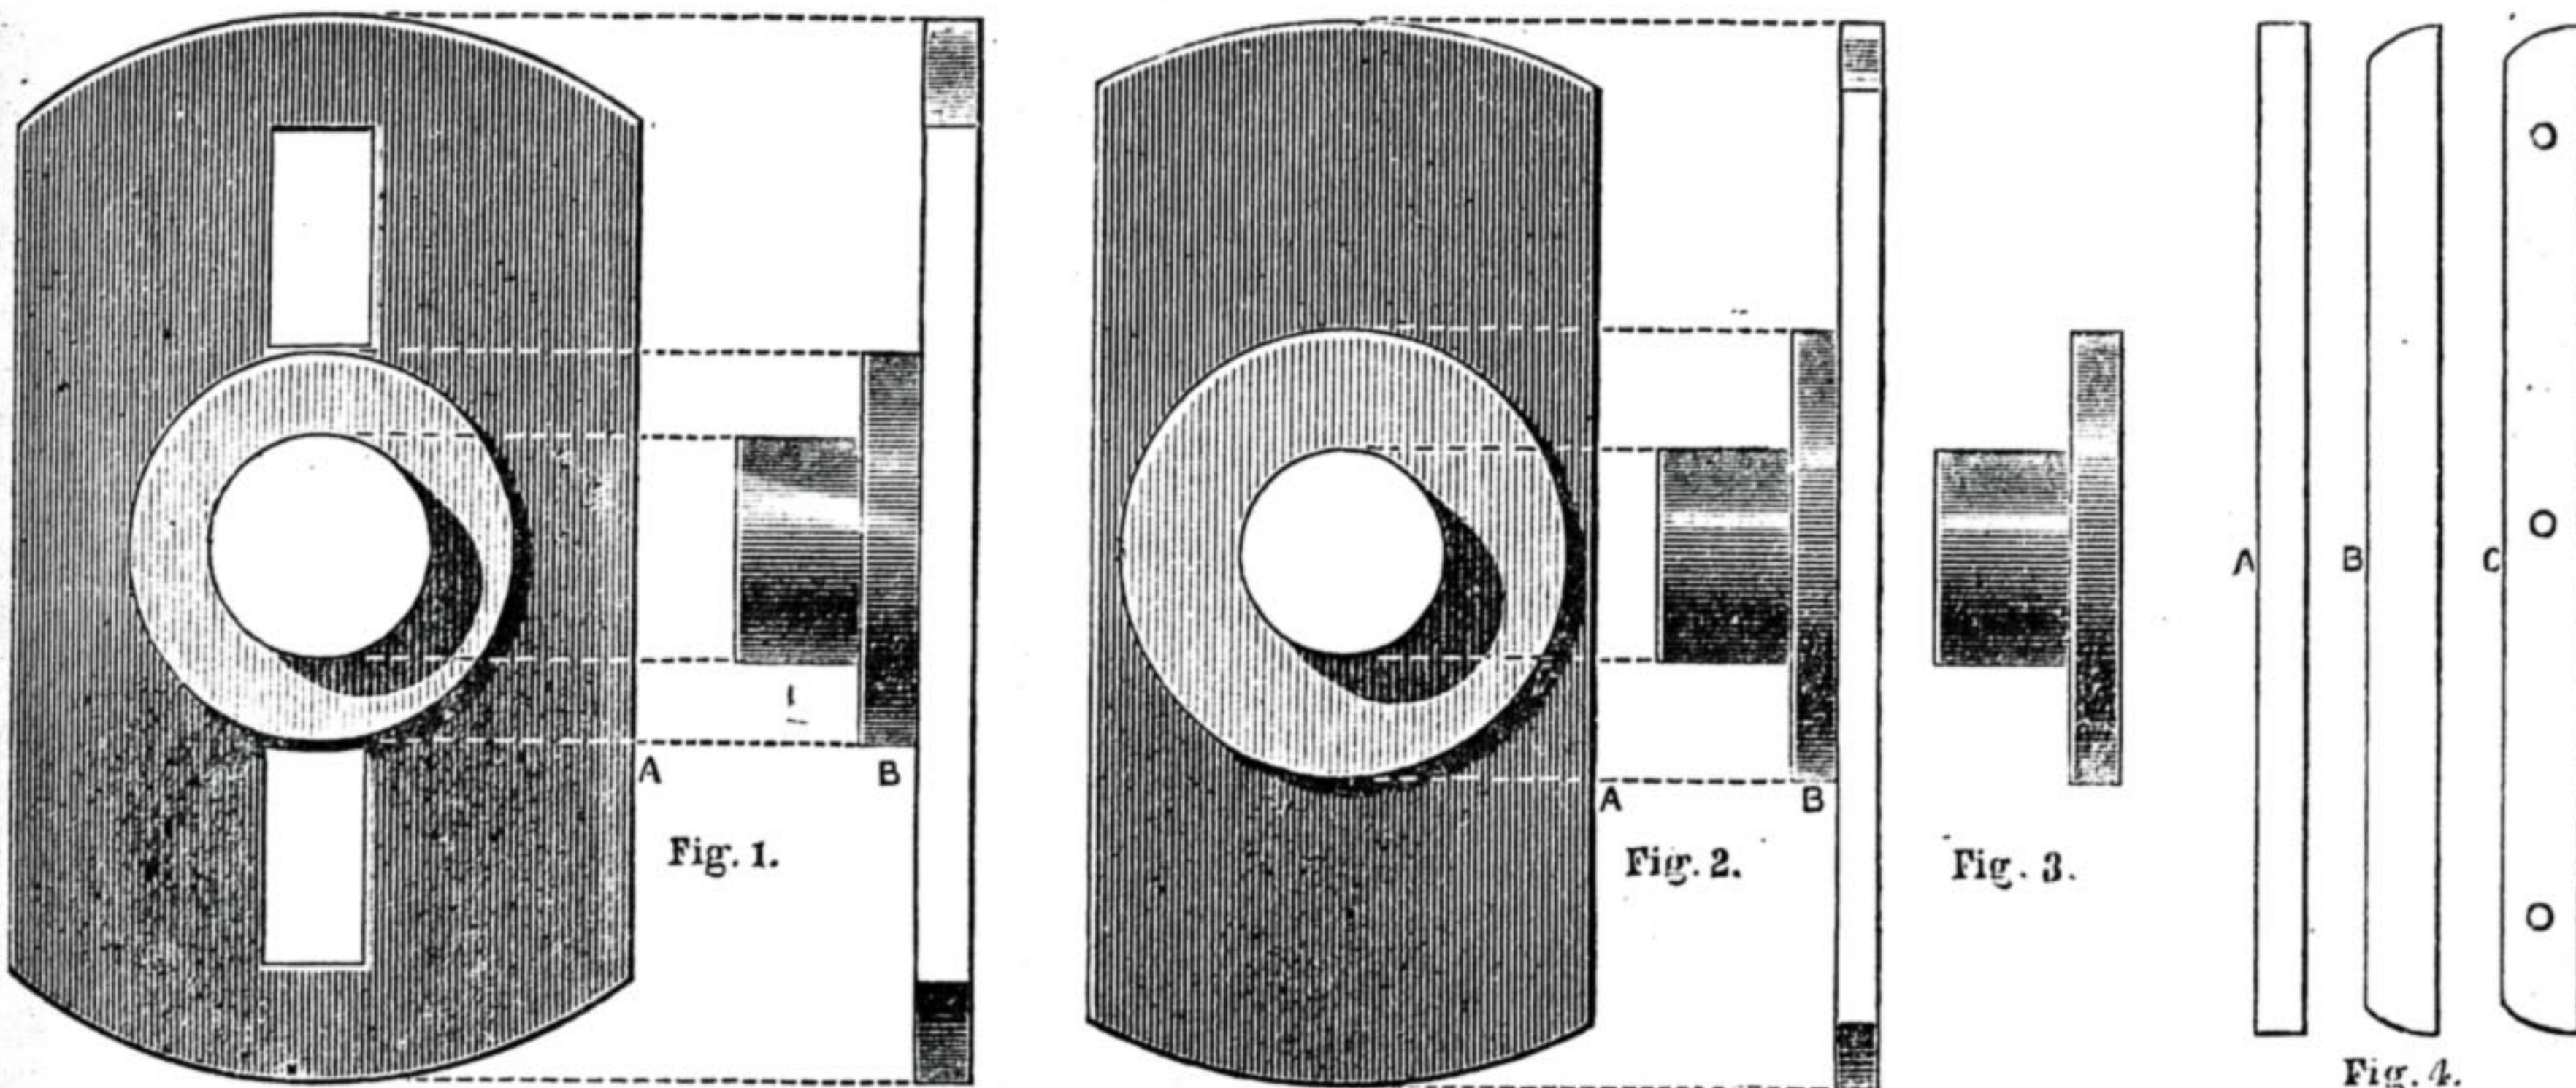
Back or Foundation Plate—A, Plan; B, Side Elevation. Fig. 2.—The Slide with Nose cast on—A, Plan; B, Side Elevation showing Nose cast on. Fig. 3.—Nose separate from Slide. Fig. 4.—Steel Bars for Ease Plate—A, Edge; B, Flat Front; C, Front drilled for Screws.
